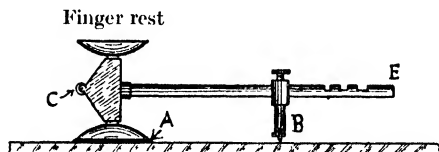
Circle cutter. A. Rubber disc; B. Steel
